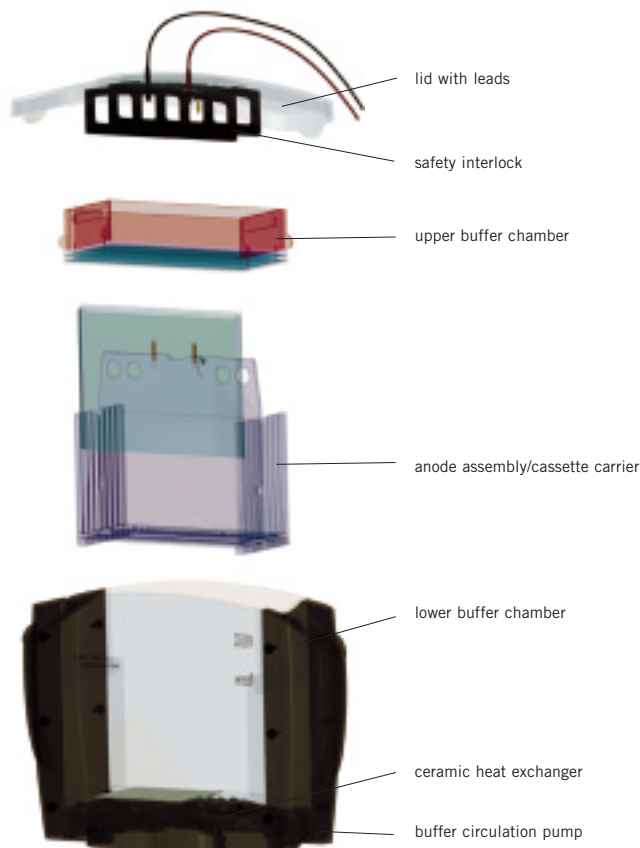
Exploded view of Ettan DALTSix Electrophoresis Unit.
